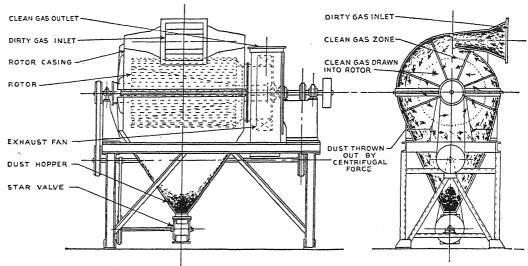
SECTIONAL VIEWS OF HOLMES-JAFFHOR ROTOR DUST EXTRACTOR
